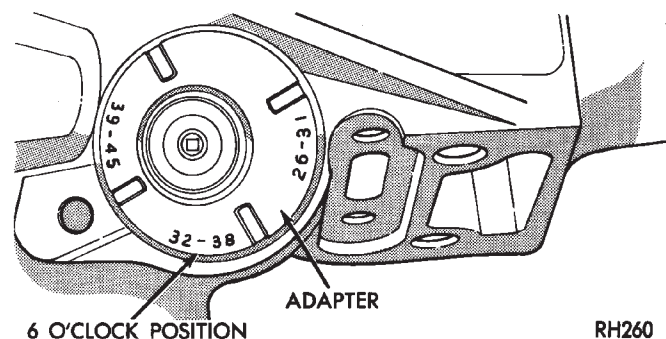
Indexing Speedometer Adapter (With Two-Piece Sensor)
